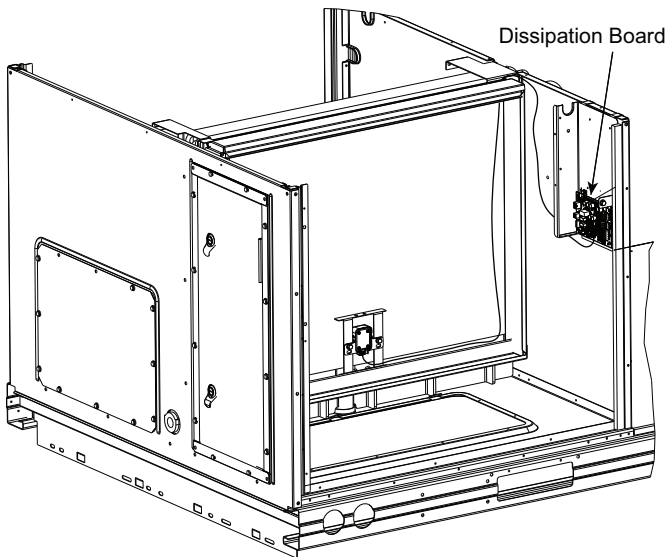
Location of Dissipation Control Board (shown with dust cover removed)
